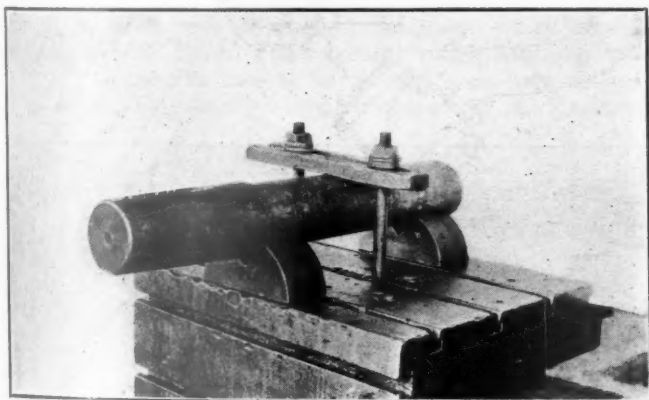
Mandrel for Use in Drilling Crosshead Keyways
